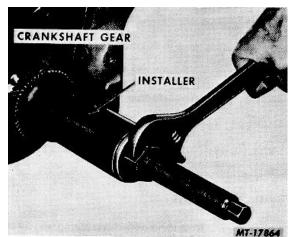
Installing Crankshaft Gear Using SE-1900 Installer
